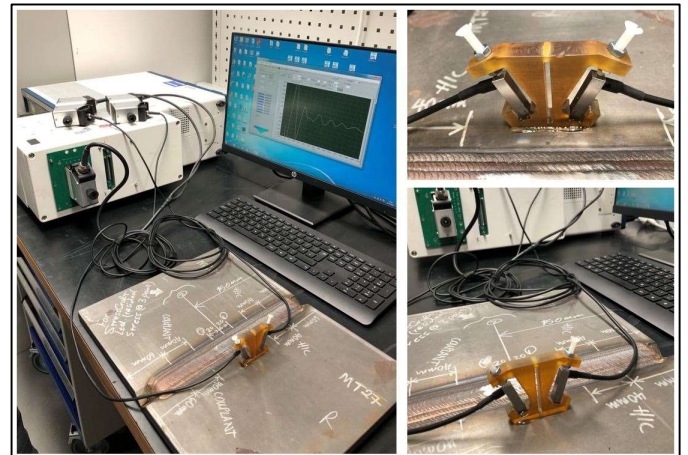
PAUT-LCR SETUP ON THE WELD SAMPLE
